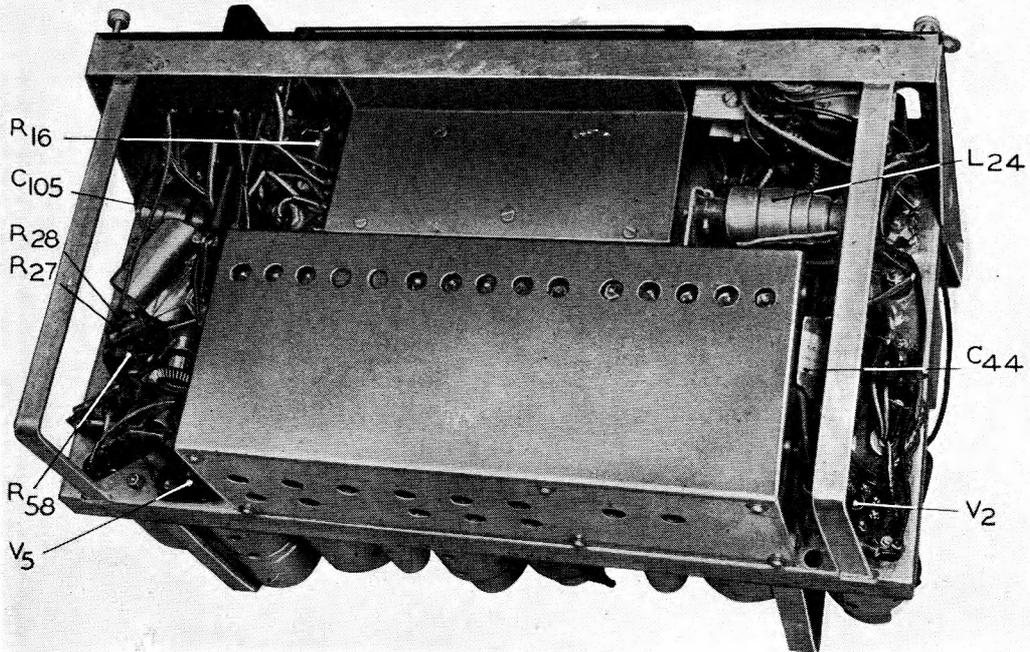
R.1155 CHASSIS, UNDERSIDE
